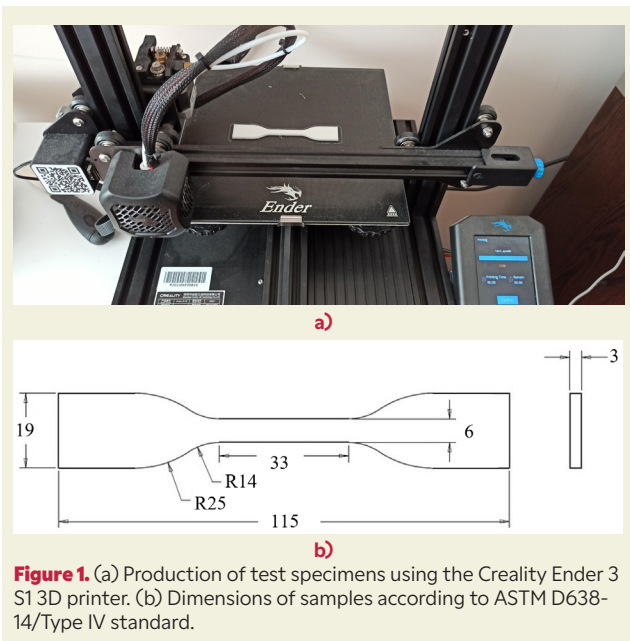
(a) Production of test specimens using the Creality Ender 3 S1 3D printer. (b) Dimensions of samples according to ASTM D638-14/Type IV standard.
